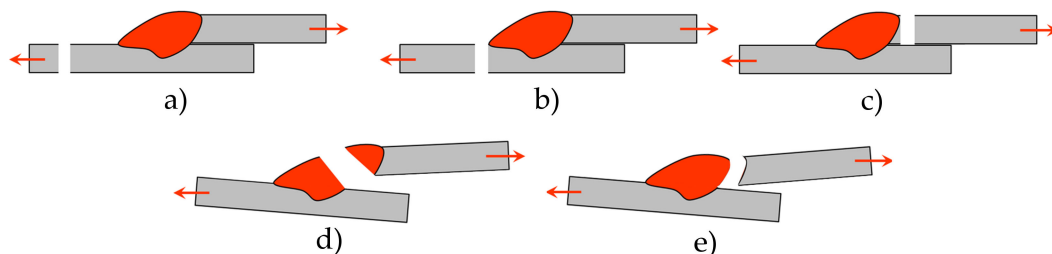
Arc weld failure modes: a) Base material failure, b) and c) HAZ failure, d) Molten zone failure and e) Border zone failure
